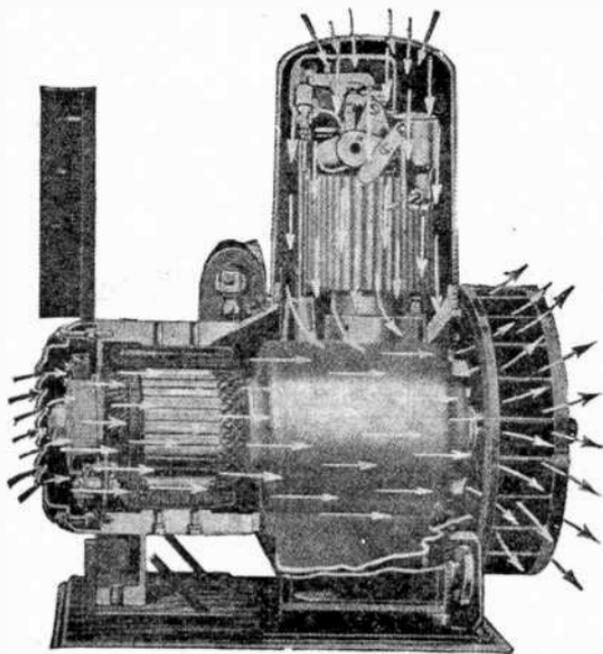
,775.—Delco air cooled engine showing ventilation. *In construction*, the fly wheel of the engine is built with a number of blades in it. When the engine is running, the blades pull the cool air down through the top of the draft tube over the cylinder through the air pockets in the crank case and exhaust it through the fan blades. At the same time air is drawn through the louvres on the dynamo cover, through the dynamo into air pockets in the crank case and exhausted through the fan blades on the fly wheel. A continued circulation of air is kept going between the fins on the engine and through the dynamo.
